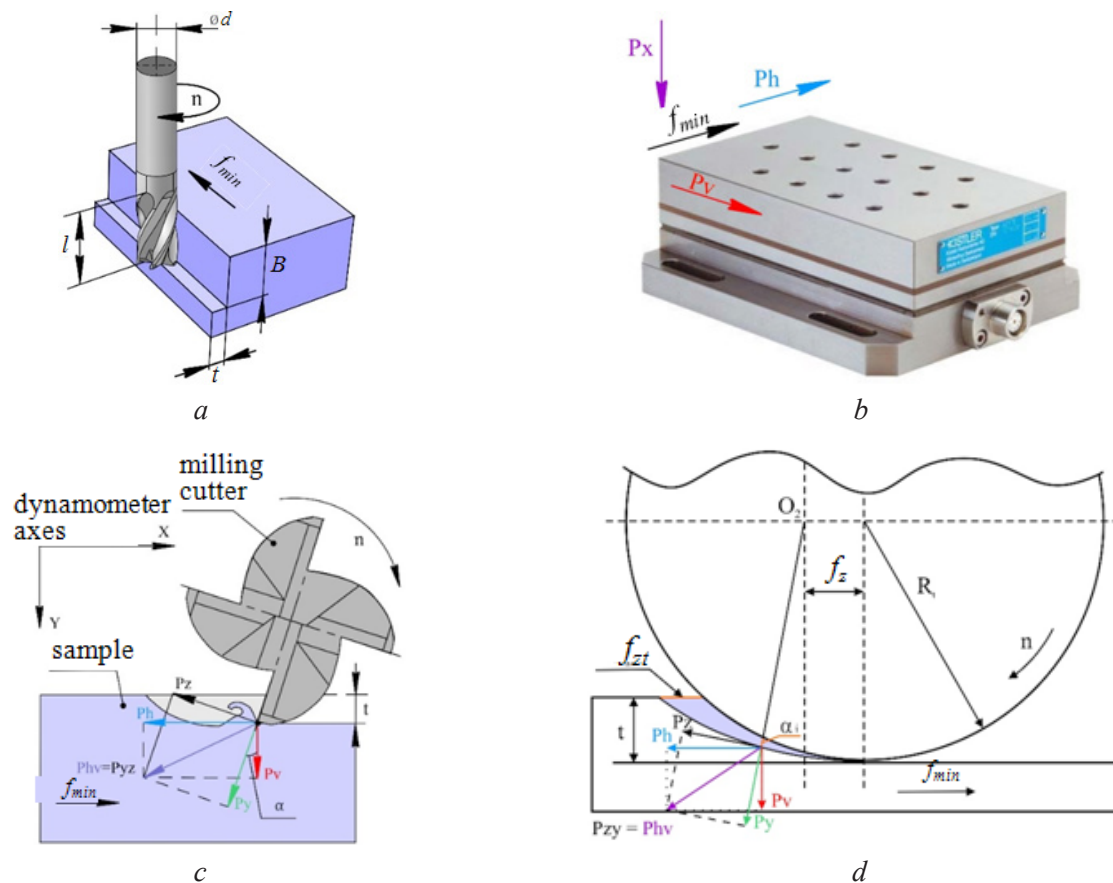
Milling parameters (a) and schematic diagrams of cutting force components acting on the milling cutter relative to the dynamometer coordinate system (b, c, d)
